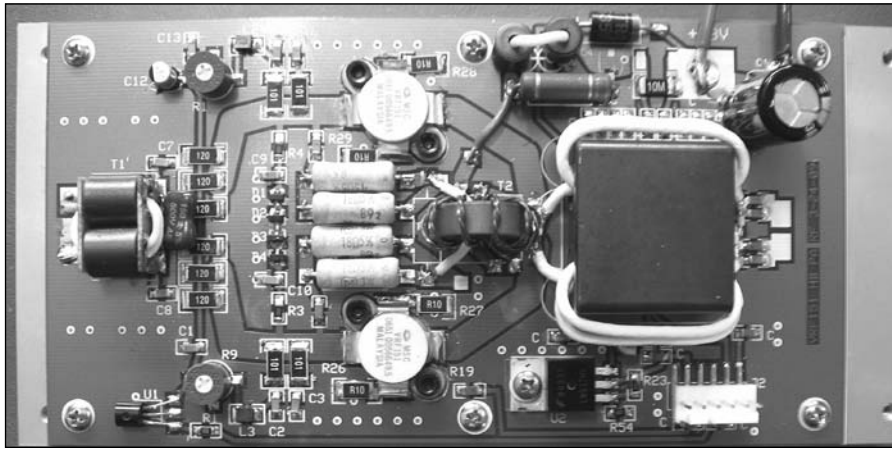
The power amplifier module PC board assembly mounted on the heat sink.
